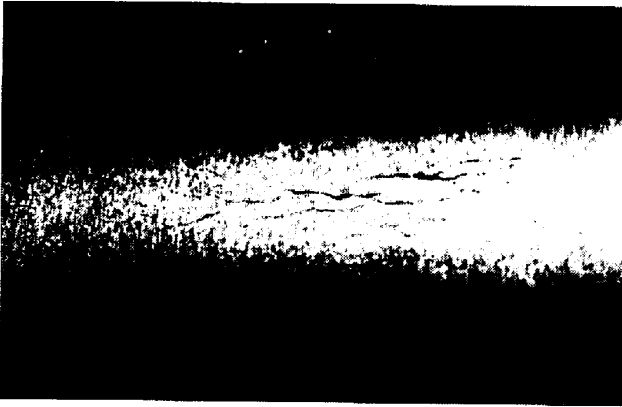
Cracks due to the rolling of cobbler sheet (after grinding).
